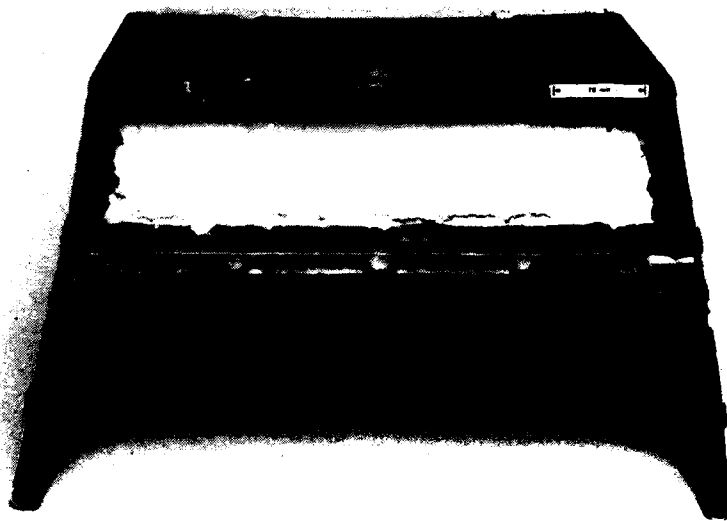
Inverted cross-sectional view of Opelika pontoon showing unbroken deck sheet and two separate ribs welded to each side wall and to deck.
